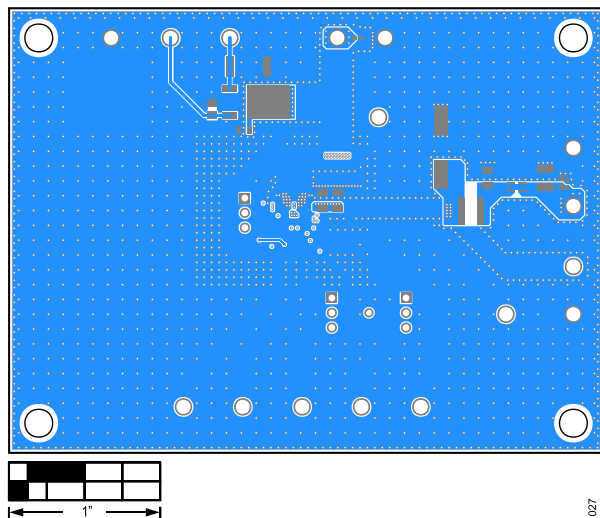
LT80603EVKIT# PCB Layout—Bottom View
